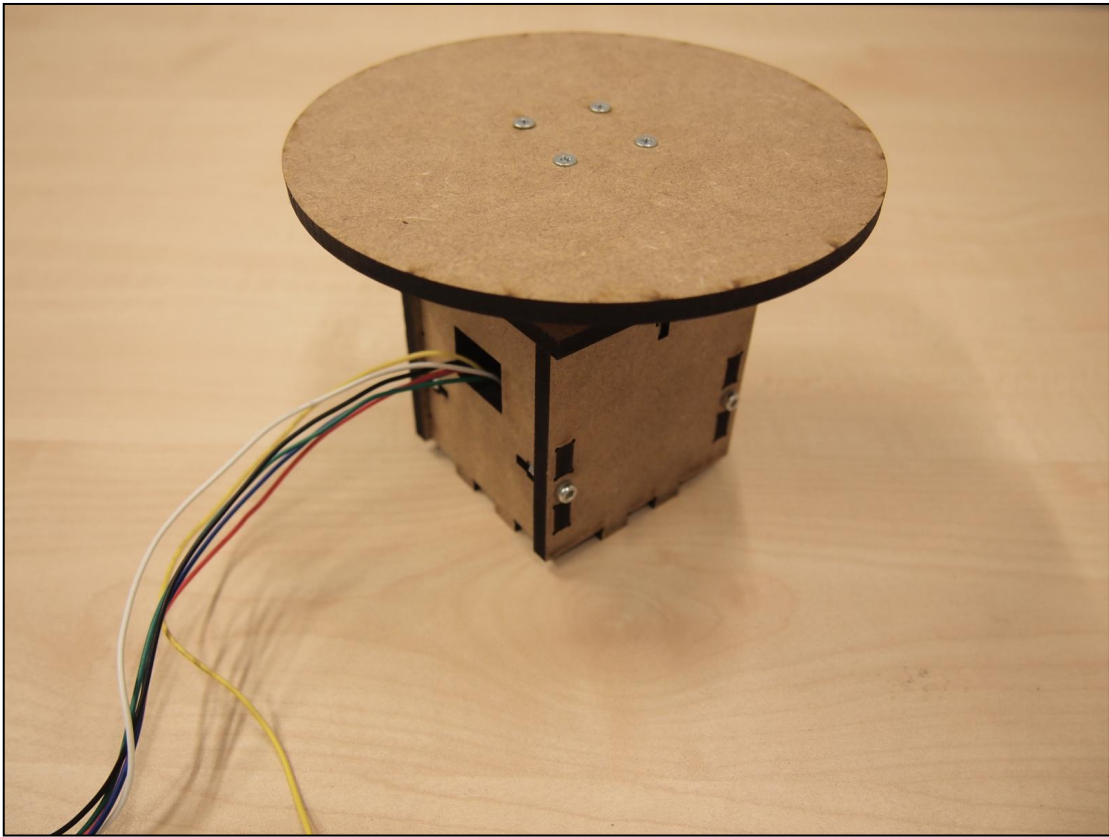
Attach the Top part of the housing and secure it with two DIN 912 M3x16 screws and nuts.
